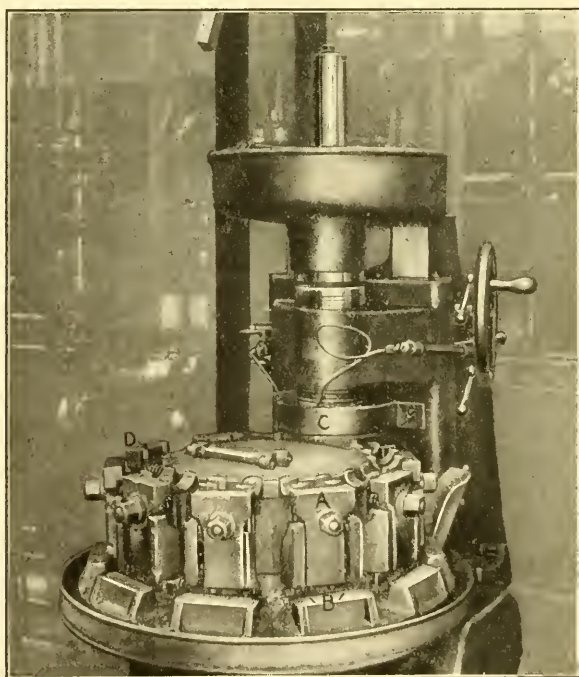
CONTINUOUS MILLING OF CONNECTING ROD ENDS
